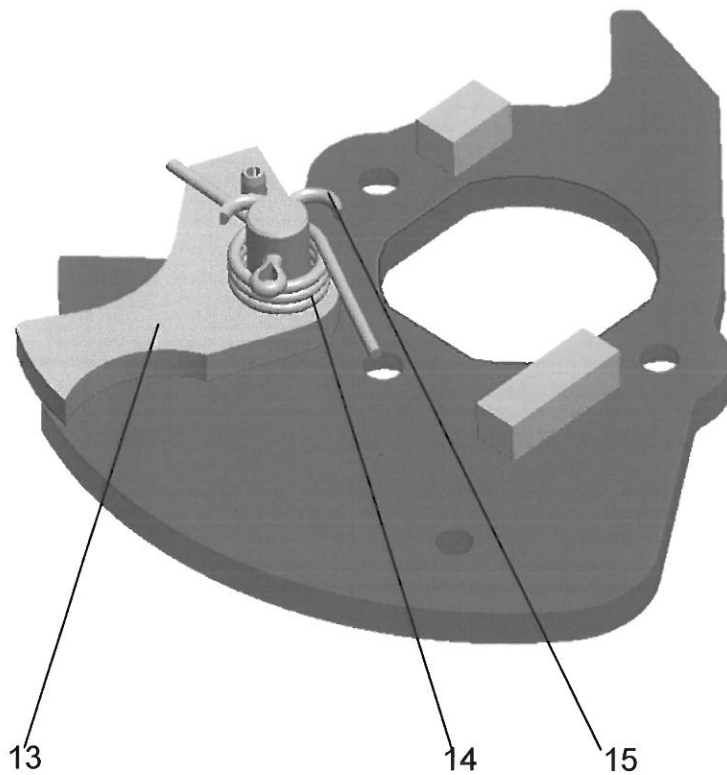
Cam 50726261 assembled with resilient lock and torsion spring.
